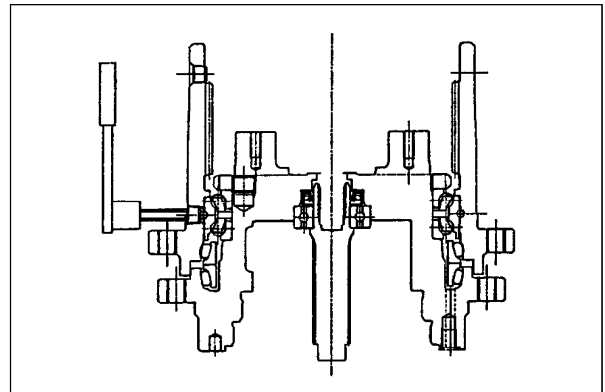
CROSS-SECTION OF SLEWING BEARING
